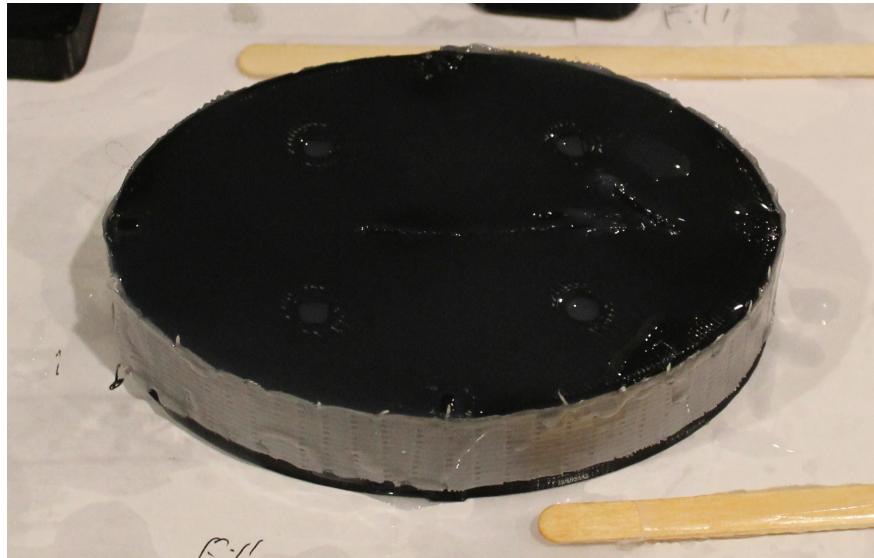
This is what the combined mold for the outer flange should look like once silicone is poured in.
